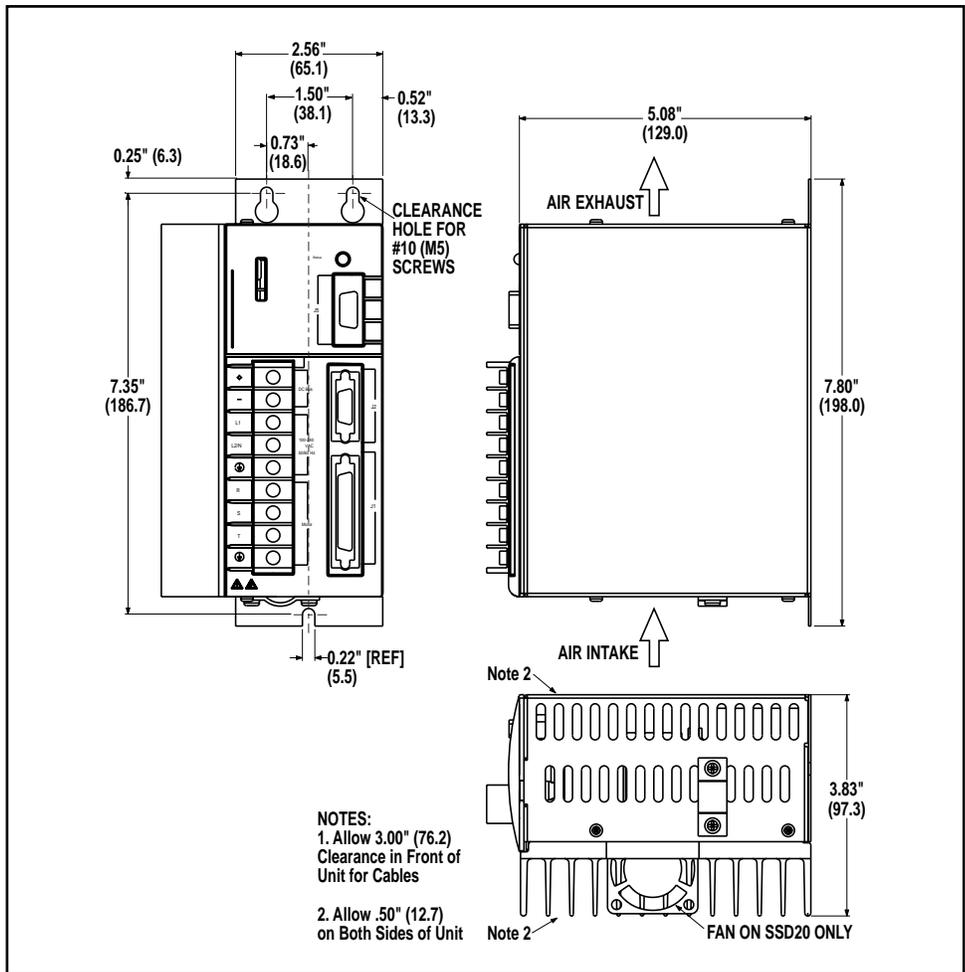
SSD 10 and SSD 20 Mounting Dimensions
